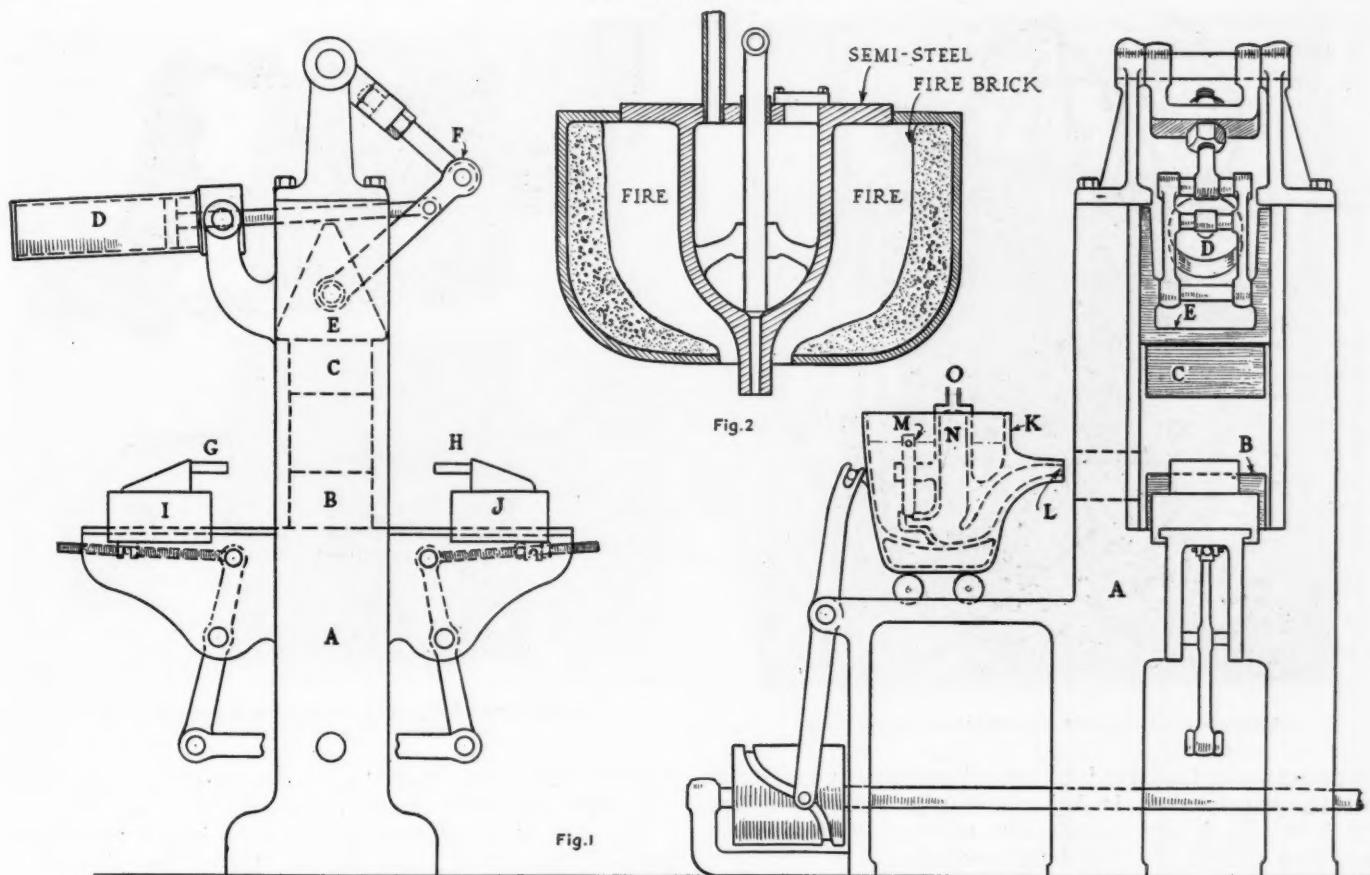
Diagrammatic sketch of the vertical type of diecasting machine. Fig. 2—Diagram showing type of closed metal pot used on the machines for diecasting aluminum
